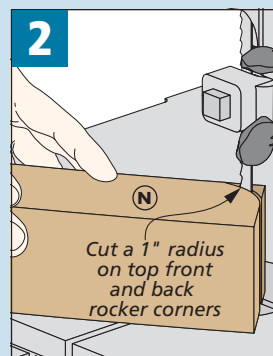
through 3 below illustrate the basics of the rocker construction. After cutting the core to shape and sanding it smooth, I resawed the veneers about 1/4" thick. You'll joint them to their final 3/16" thickness after they're glued to the rocker core. When cutting the veneers to shape, leave a generous amount outside the cut line. This allows you some wiggle room when gluing the veneer to the core. The excess will be trimmed at the router table after they're glued to the core.
